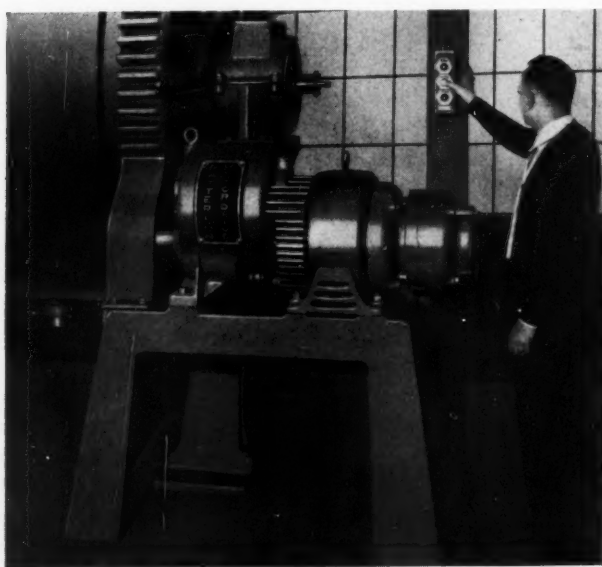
This electrical mill drive embodies a magnetic brake and "inching" device, giving exact control
